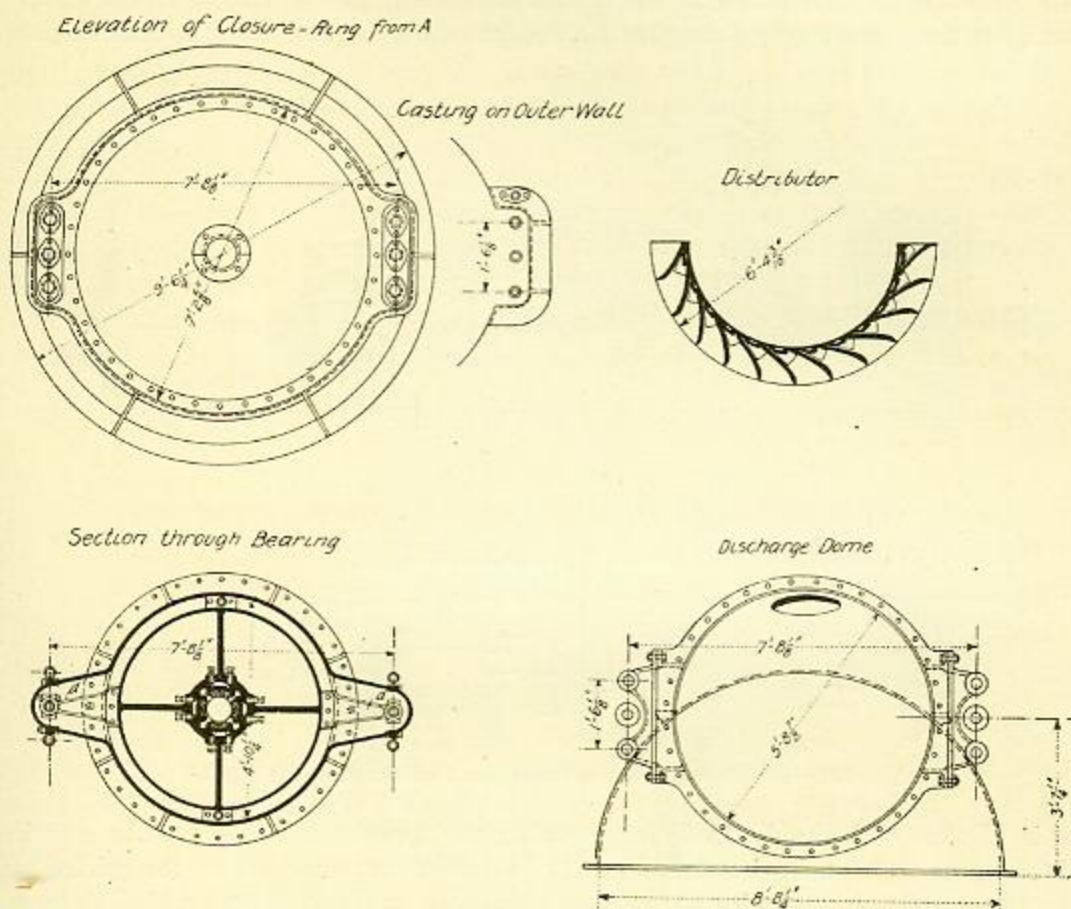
Details of Regulating Device for Turbine shown in Fig. 72.
